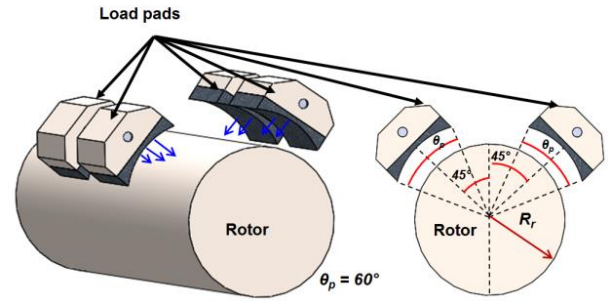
Section of mechanism to apply a static load on rotor: porous pads supplied with external pressure push on the rotor.
